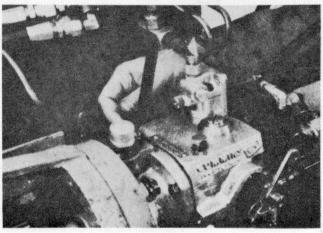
G-86. Setting AFC Plunger Position with Service Tool 3375137
